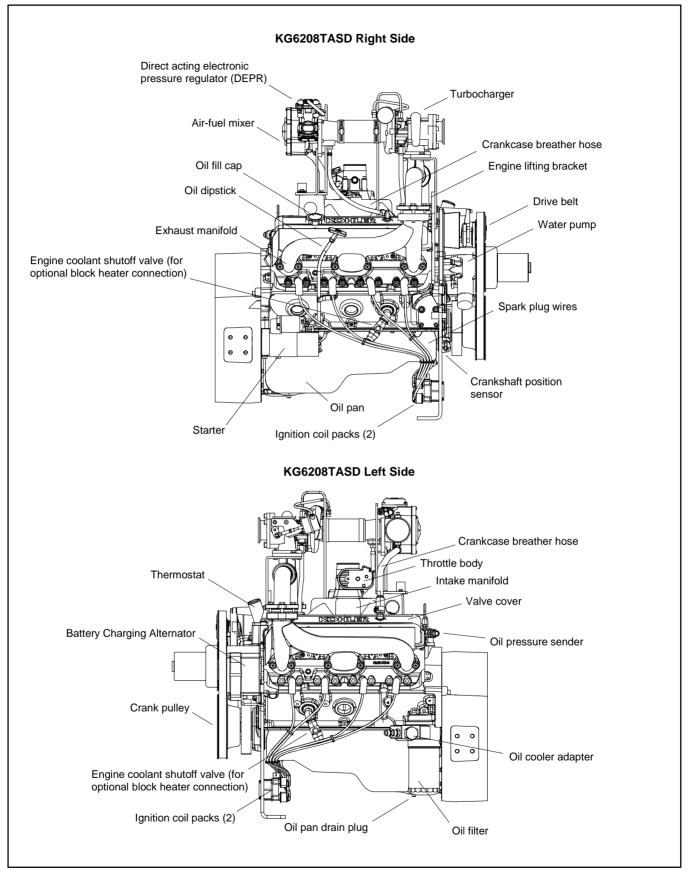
KG6208TASD, Standard Duty Turbocharged Engine Side Views
